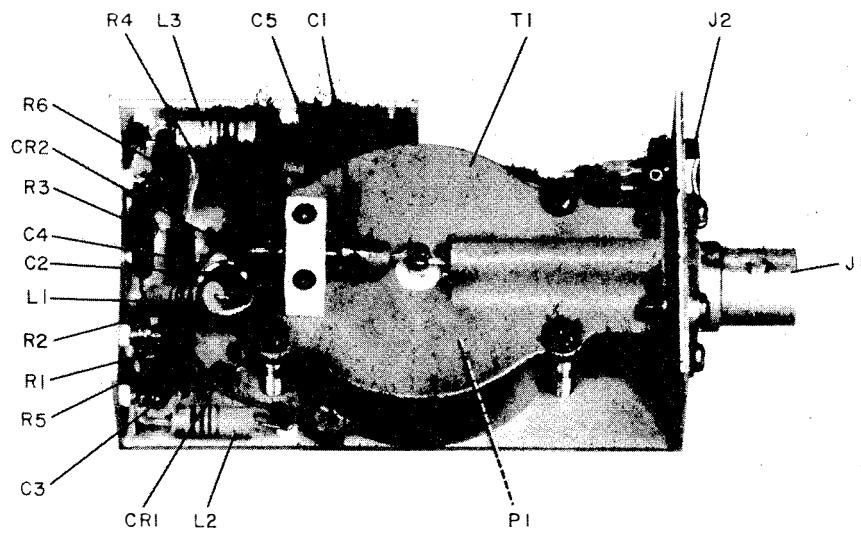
Phasing Discriminator Assembly A5, Parts Location
